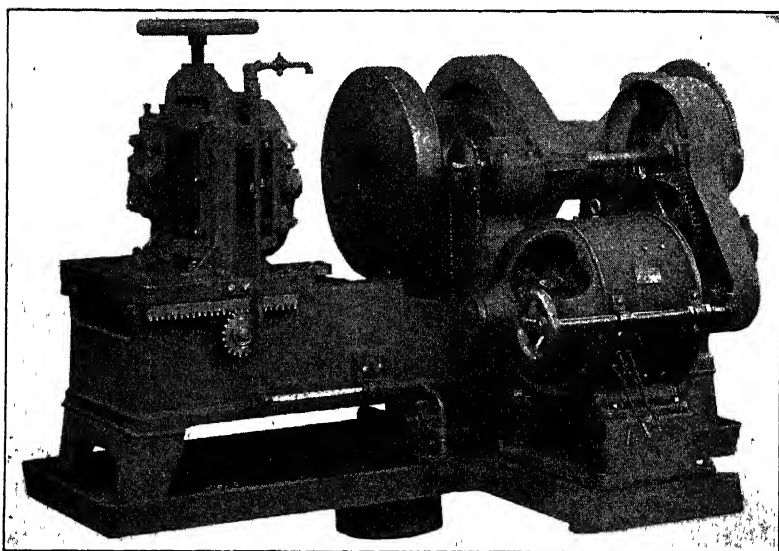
Lincoln adjustable speed motor driving pipe cutting machine.
